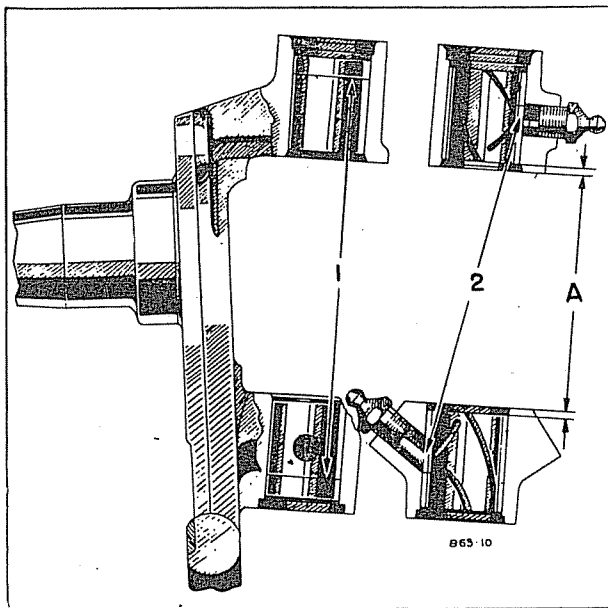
King Pin Bushings Installed (Reverse Elliott Type Axle).
